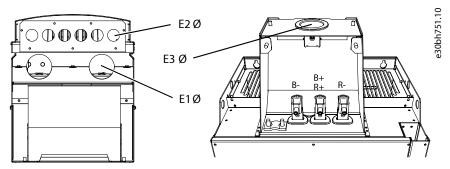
Dimensions of the Mounting Holes for VACON® NXS/NXP AC Drive, FR8
